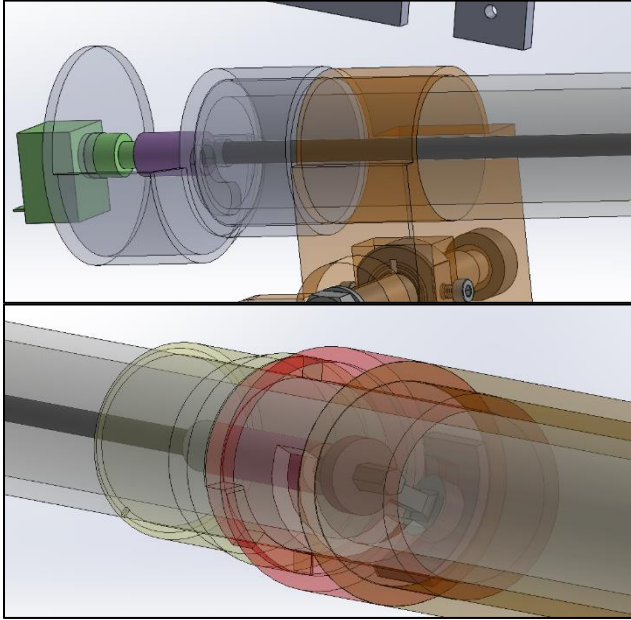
Overview of throttle subassembly and connecting rod. Above: Throttle encoder mount and coupler Below: Throttle shaft plate and hex coupler.
